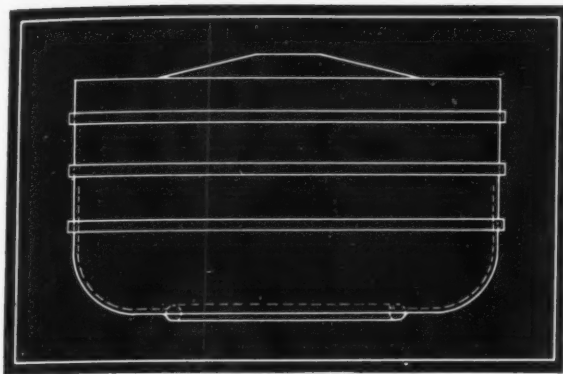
Centrifugal basket, spun out of sheet metal, which has no joints except where bottom is fastened to hub flange
